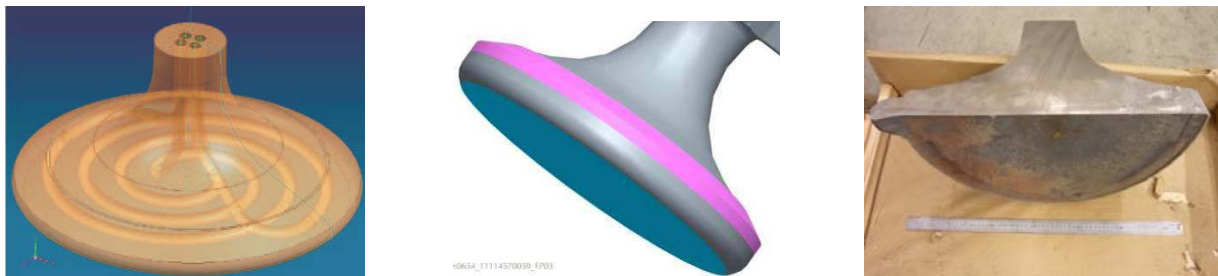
Design concept of cooled valve, and blank component of spindle disc
